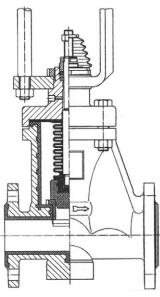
A lined-body globe valve Courtesy of Richter Chemie-Technik GmbH
